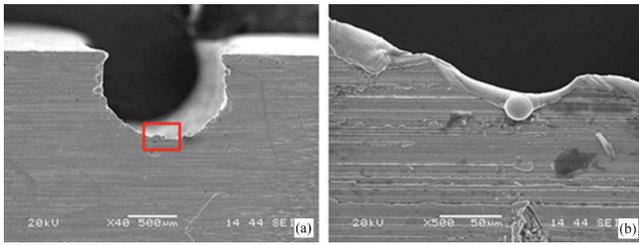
AISI4140: a) a drilled workpiece half, b) magnified view of selected region
